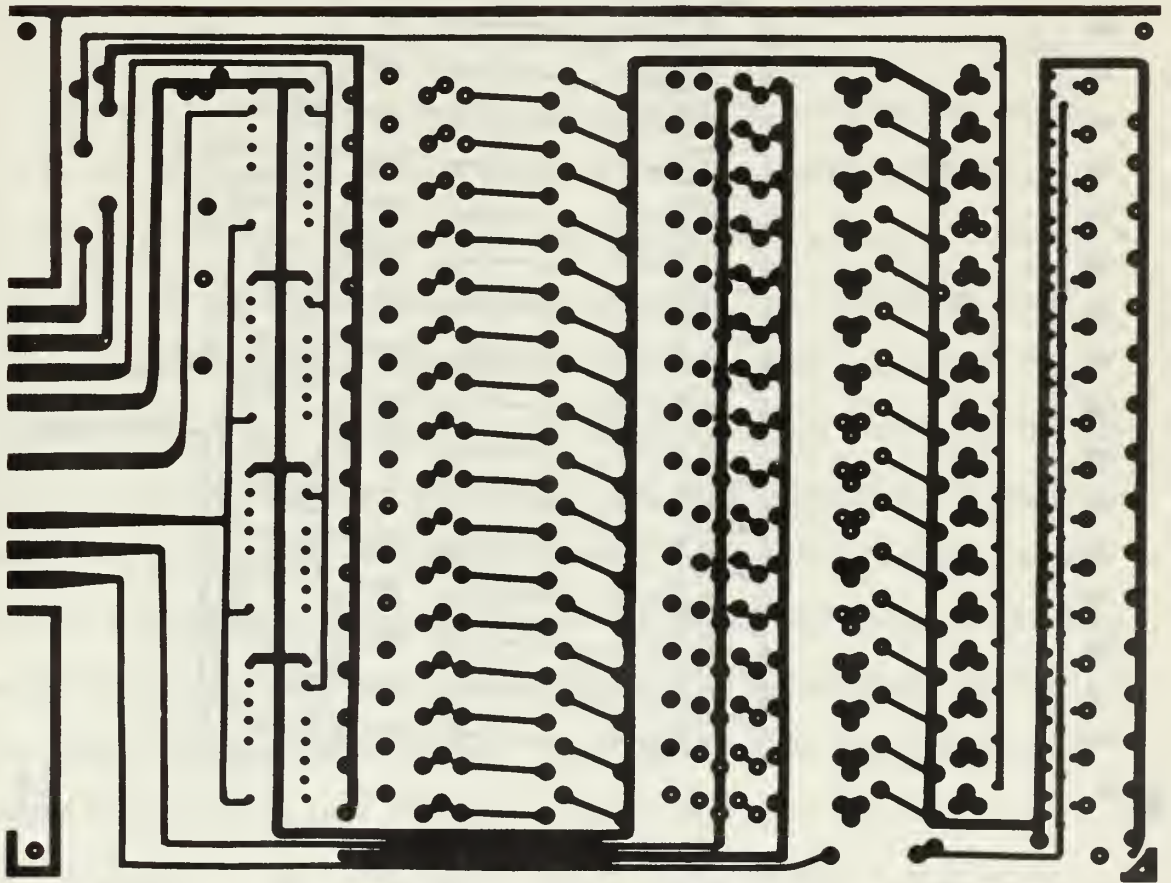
Printed Circuit Pattern for Bottom of PC Board (Actual Size)
